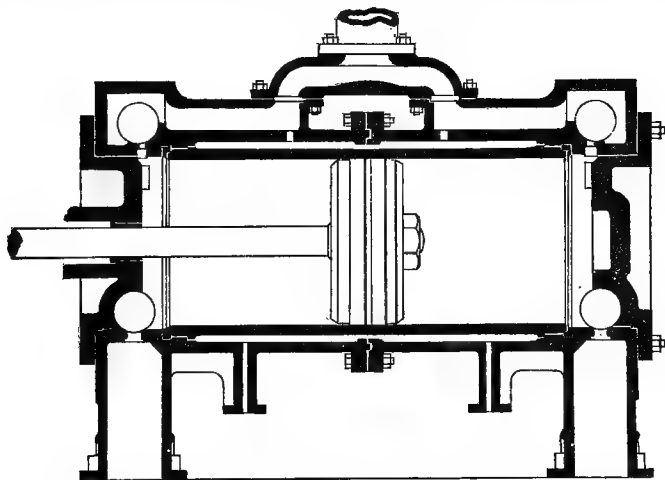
Steam jacketed cylinder of the Lecouteux & Garnier engine.
